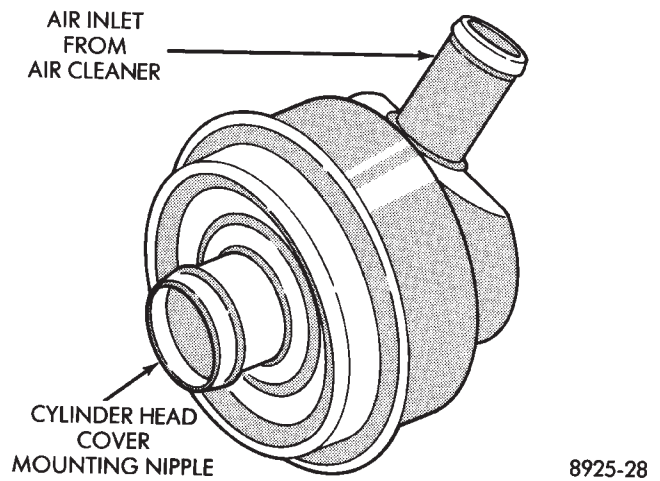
Typical Crankcase Breather/Filter—5.2L Engine
